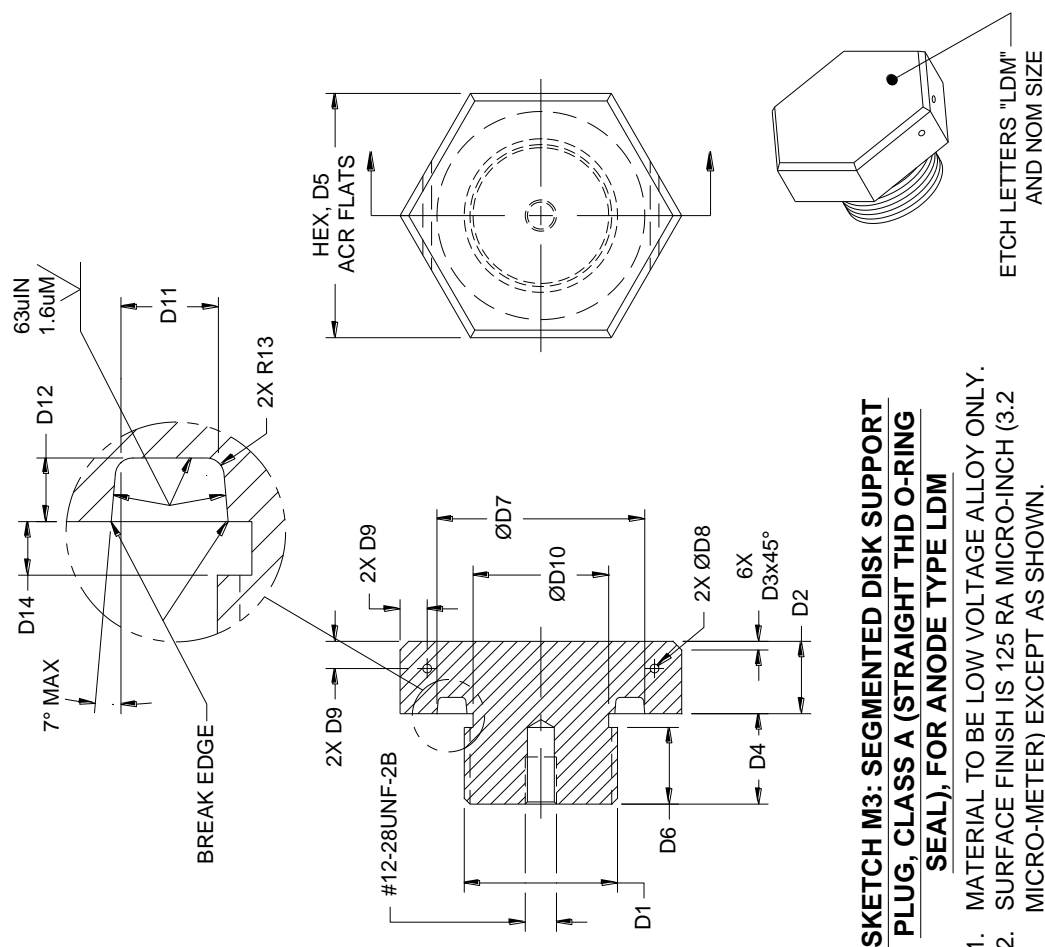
Aluminum, segmented disk (interlocking threaded core) type LDM.
